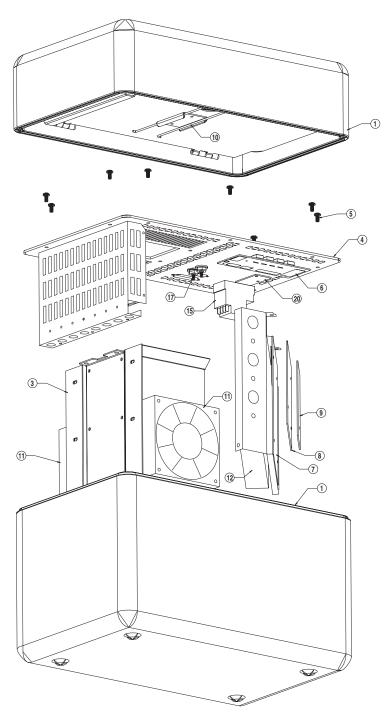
Side View of Cooling Block Assembly and Internal Assembly
